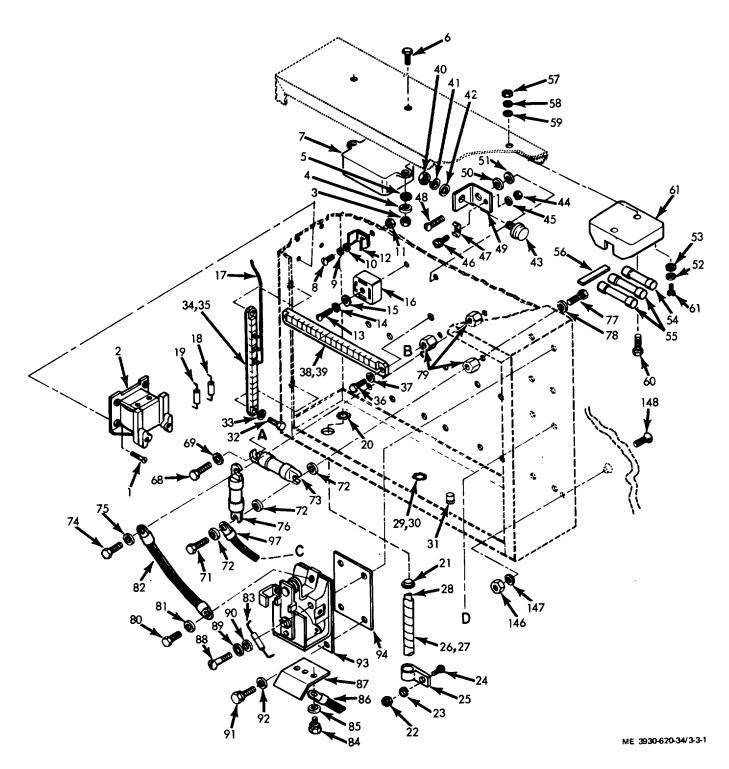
Contactor unit, exploded view. (Sheet 1 of 2)
